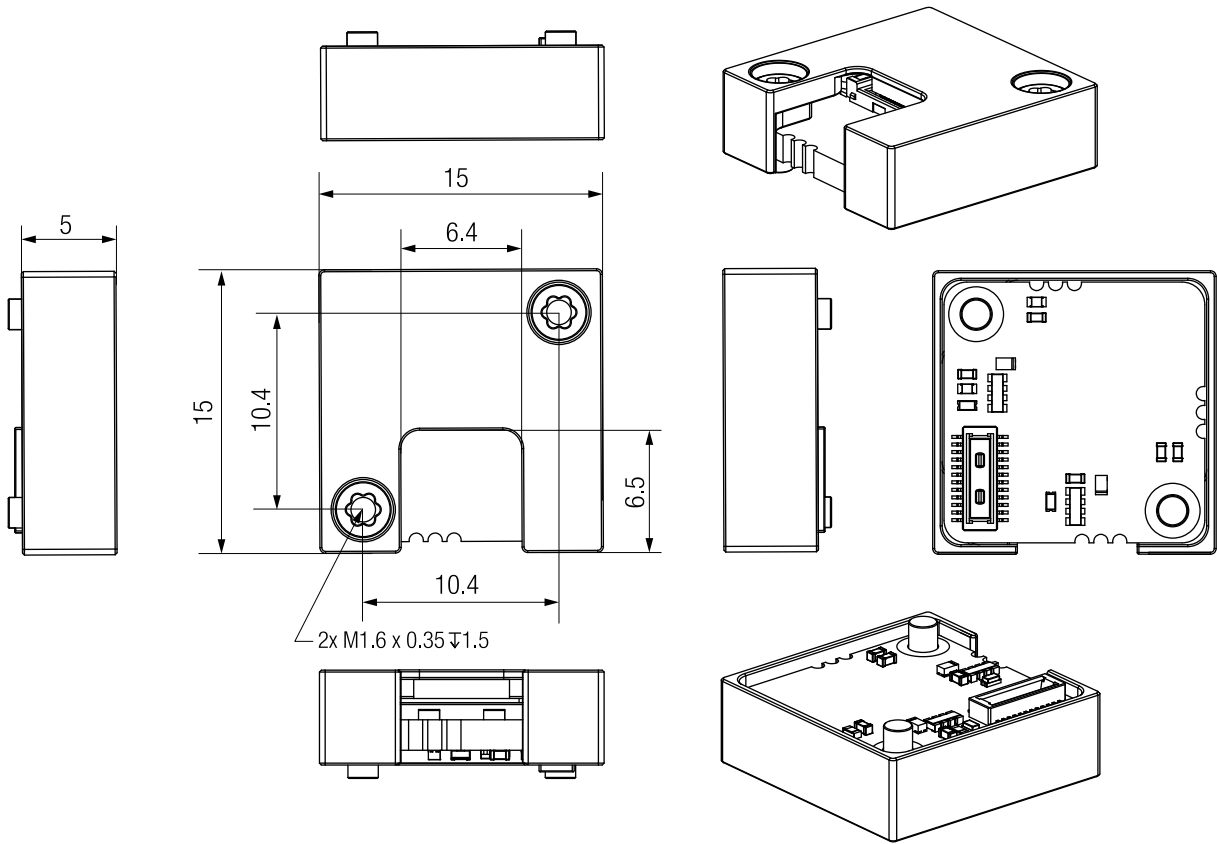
Dimensional drawing of ADPT-MU-CX3-UC
